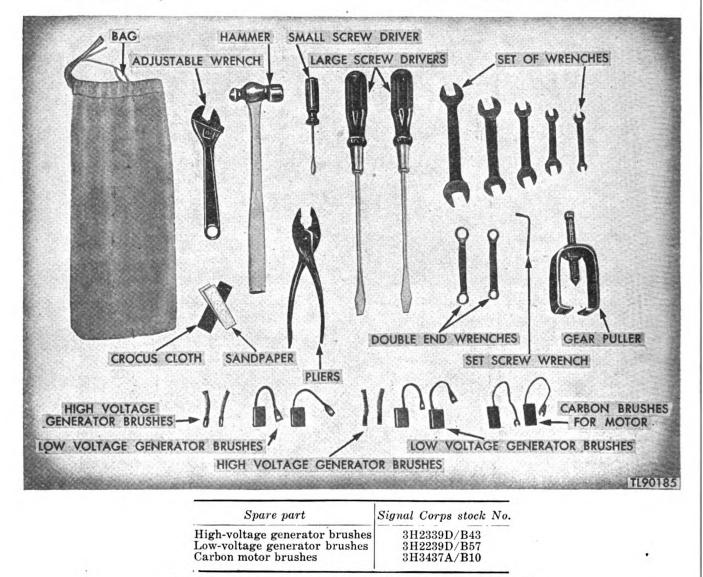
Spare parts and tools for Motor Generator MG-37-A.
